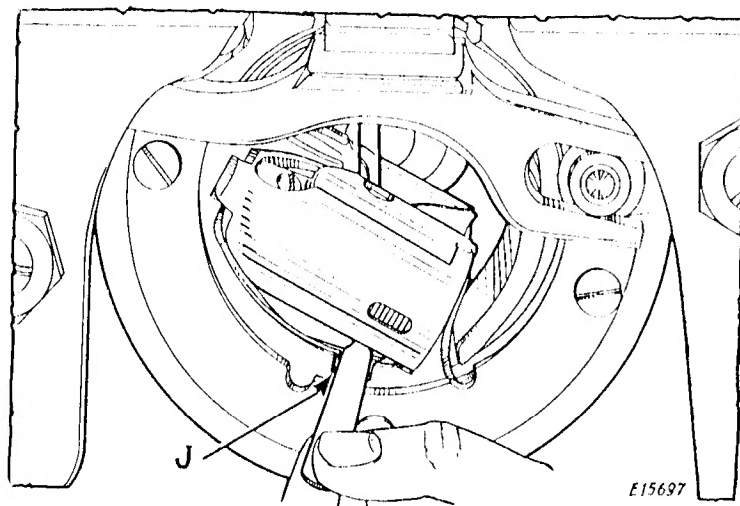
Removing the Left Bobbin with Shuttle Cylinder Opener 120571
